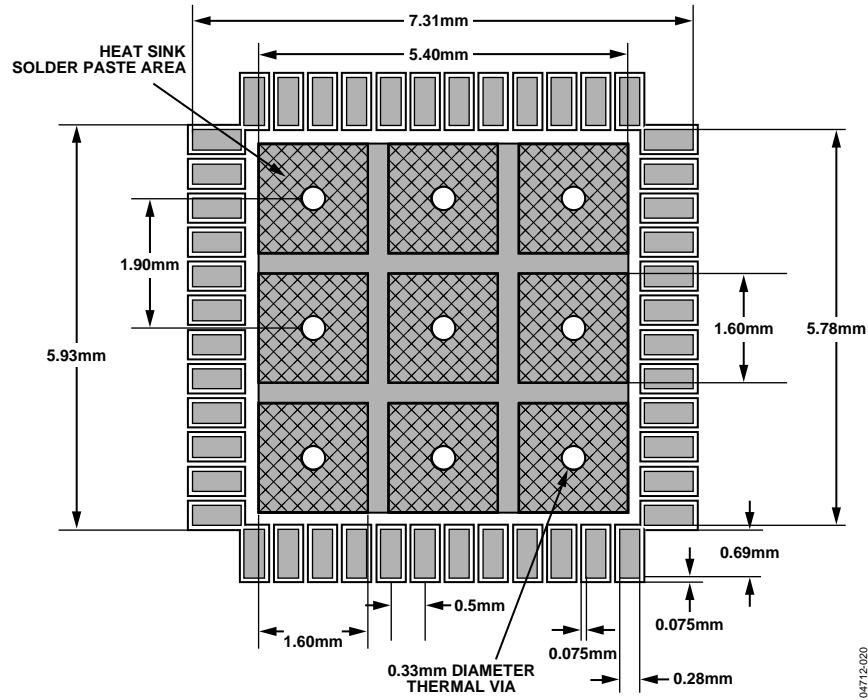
48-Lead LFCSP (CP-48) Land Pattern—Dimensions shown in millimeters
